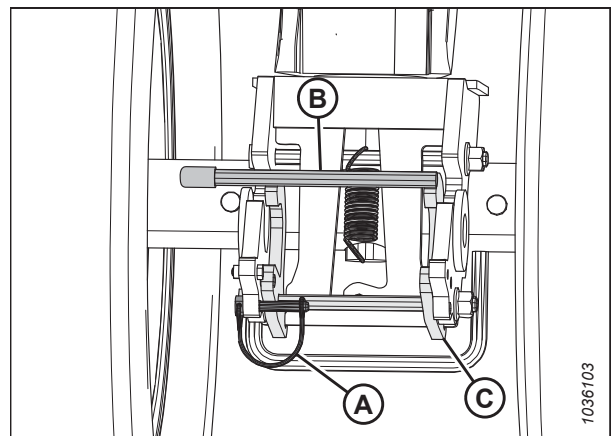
Left Transport Wheels – Rotation Lock Latch Disengaged
